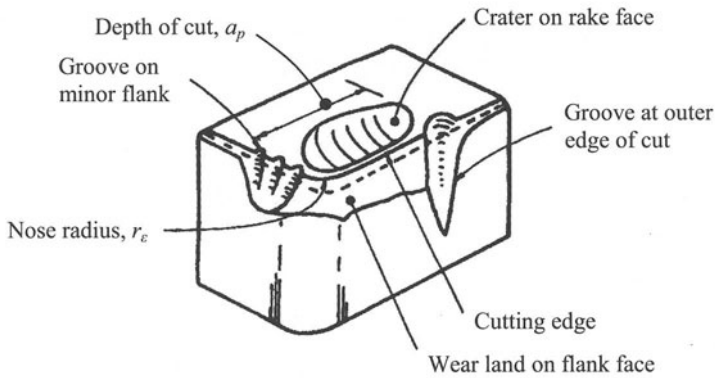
Various wear and fracture surfaces on a worn cutting tool
